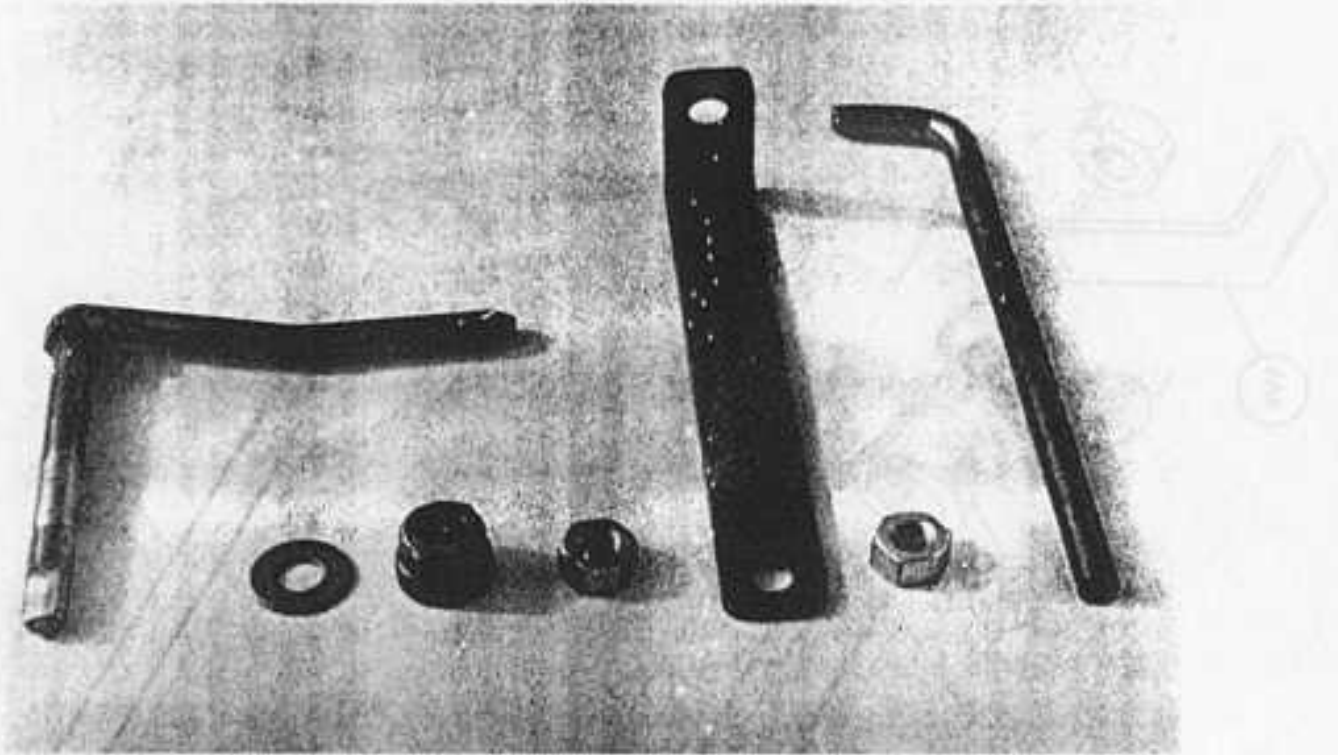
Parts for the shaker assembly. Note the flattened portion of the bolt (at extreme left) which positively locks into the handle (third from right). At the extreme right is a "poker bar" which engages into the hole in the top of the handle to operate the shaker mechanism; the shaker handle will get very hot during normal gasifier operation.
